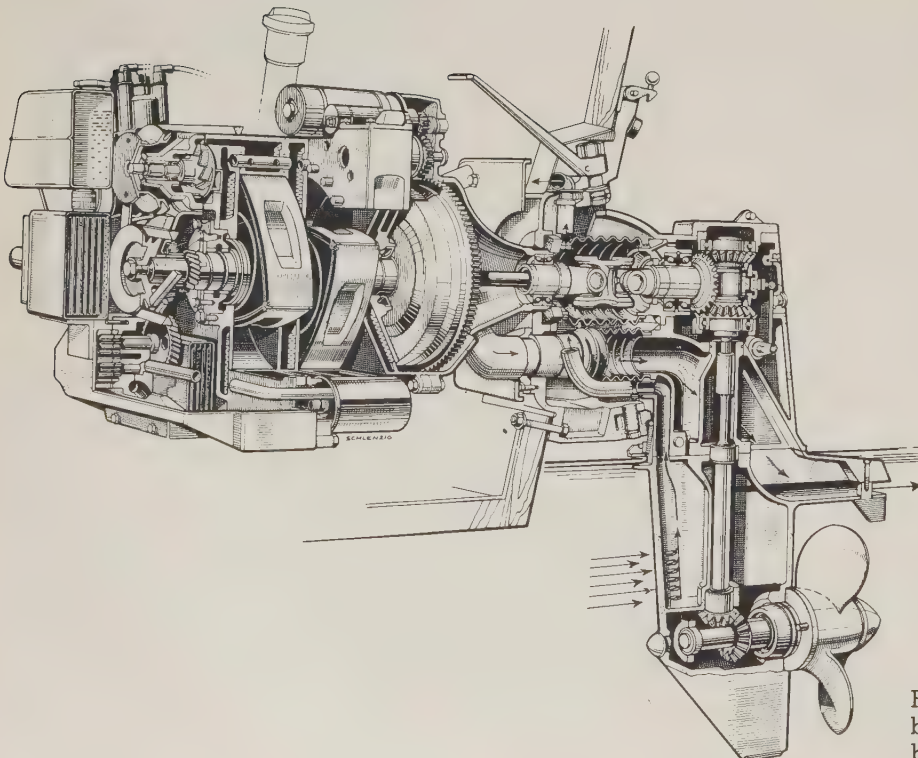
A two-rotor Wankel engine combined with a stern drive unit to power a boat. (NSU)
